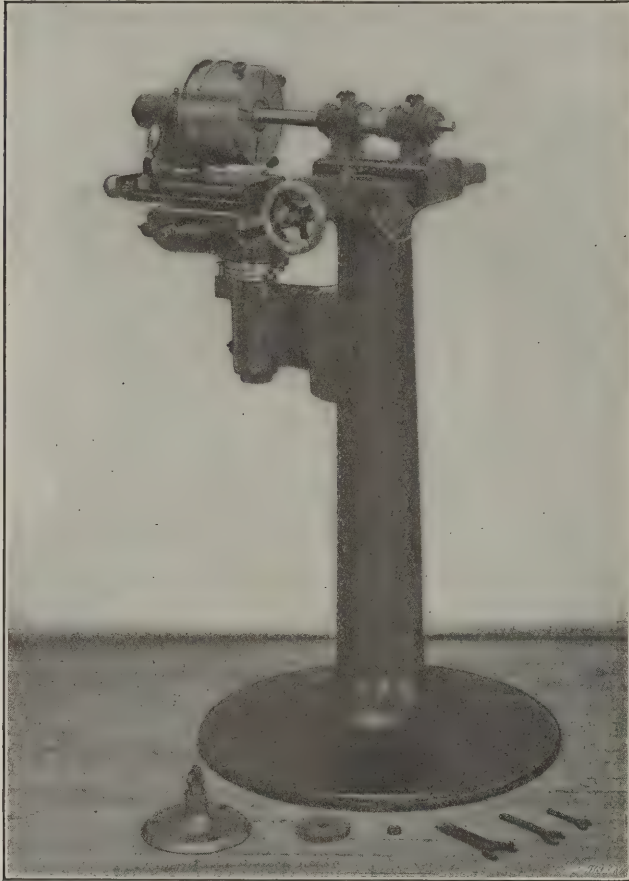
Simple Form of Machine for grinding Grooves in Races
